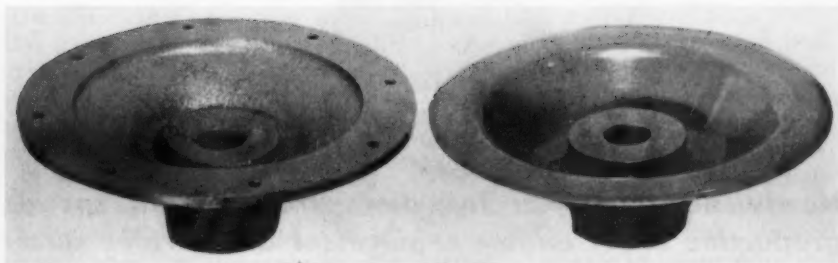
(Left) Cast iron hub and disc has average weight of 71 lbs., comparatively rough surface appearance and top operating
